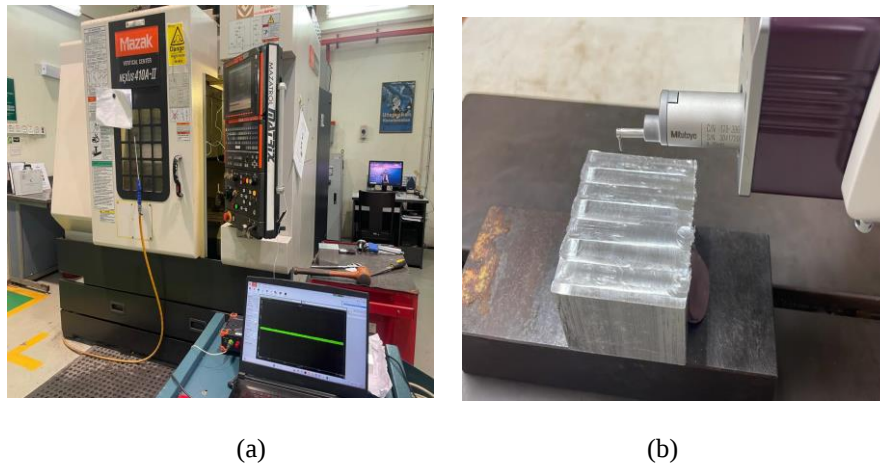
(a) CNC milling machine with vibration sensor; (b) Surface roughness tester
